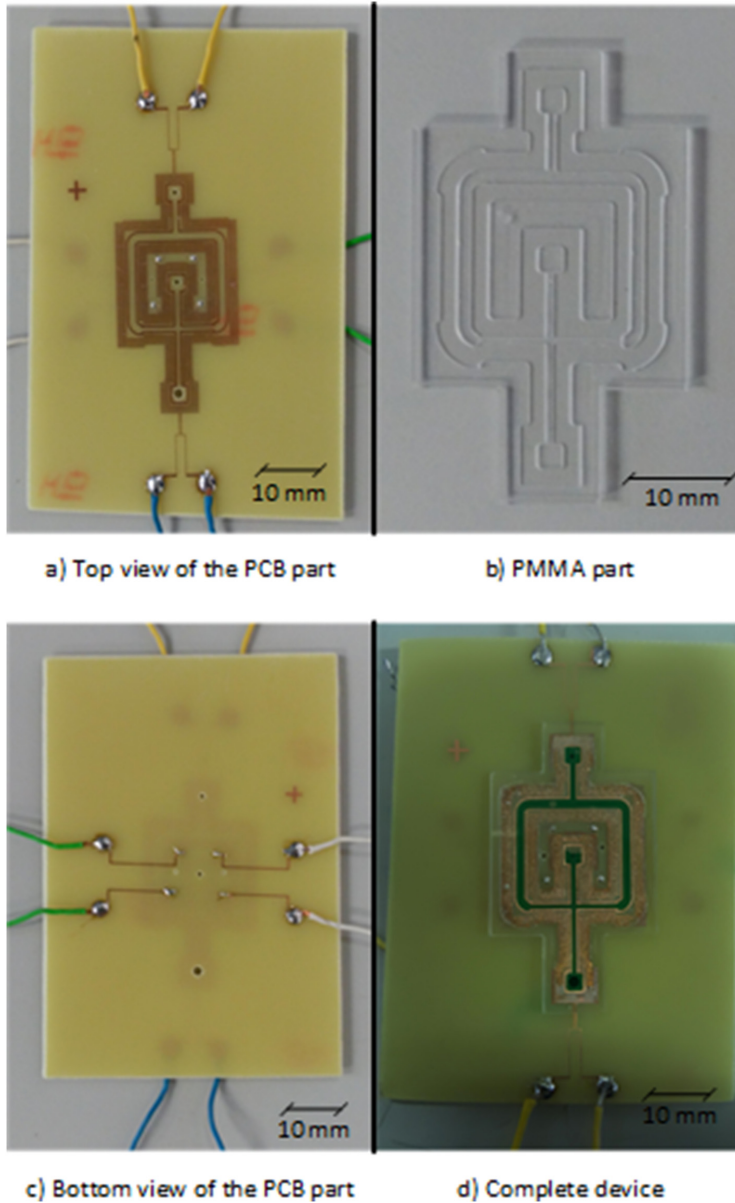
Fabricated parts of the device: a) top view of the PCB, b) PMMA part, c) bottom view of the PCB and d) final fabricated device.
